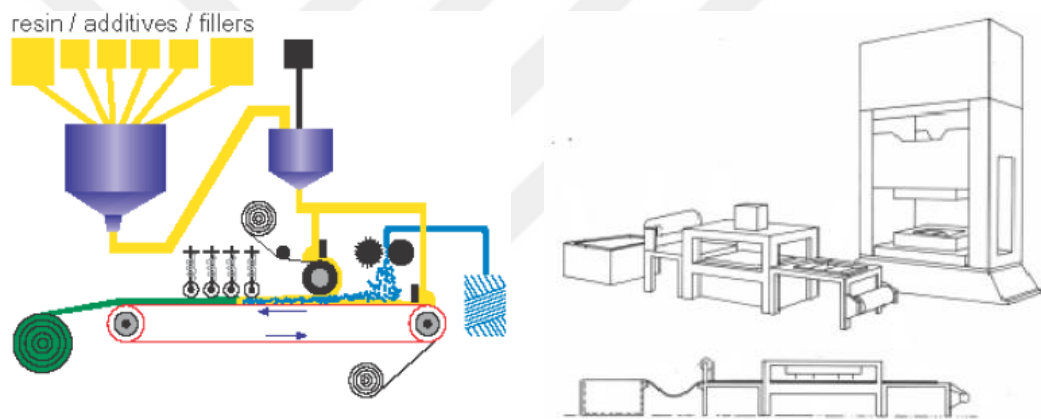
Sheet Molding Compound Precursor Production (Left) and Hot Pressing of the Sheet Molding Compound (Right) [37]
